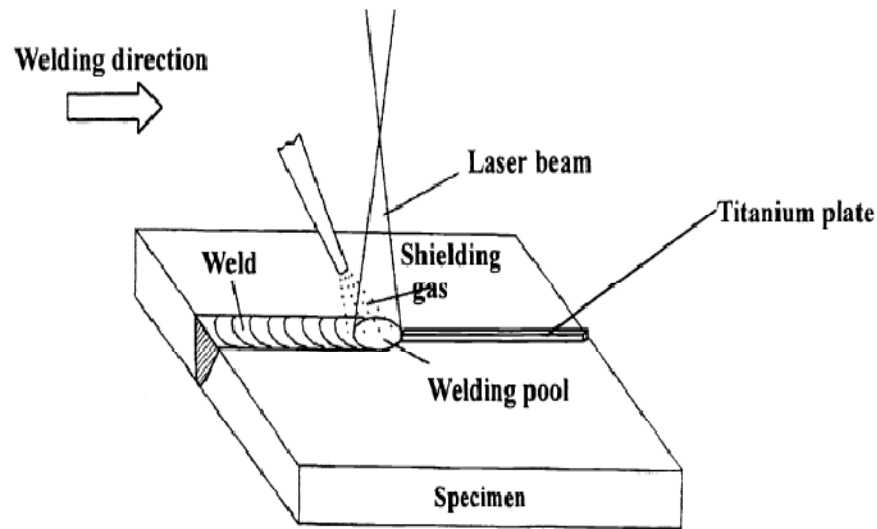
Laser welding setup for 6061 Al with SiC (Chen, et.al; 2000)
